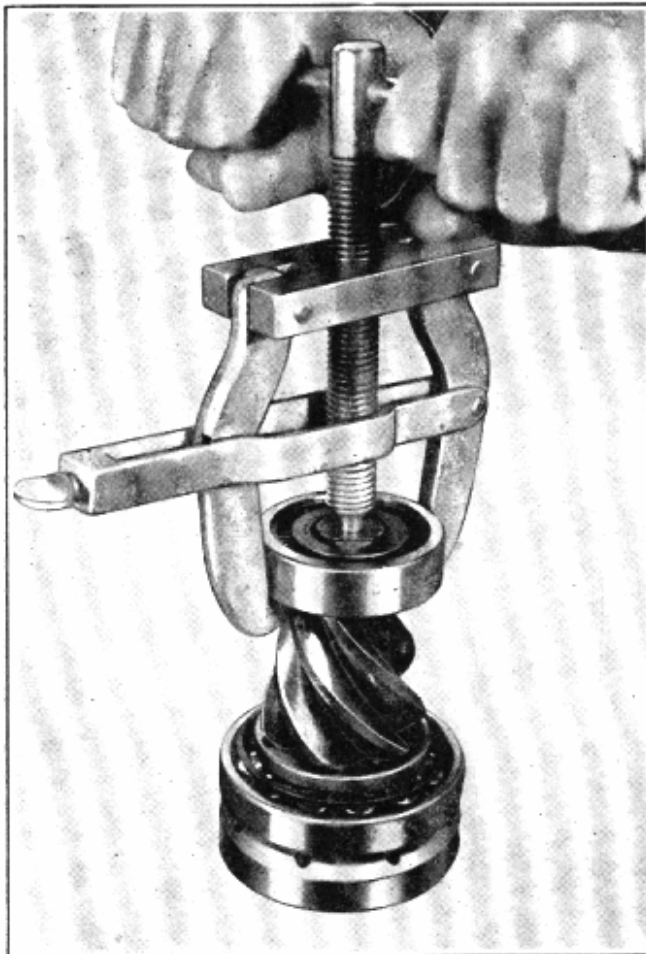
Removing the Single Row "Outboard" Bearing Using Puller No. TR278R
